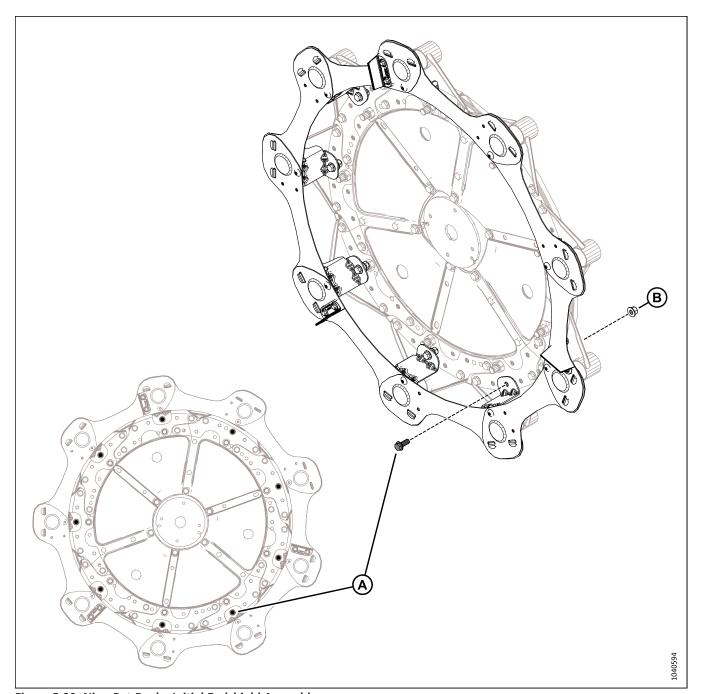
Nine-Bat Reel – Initial Endshield Assembly
